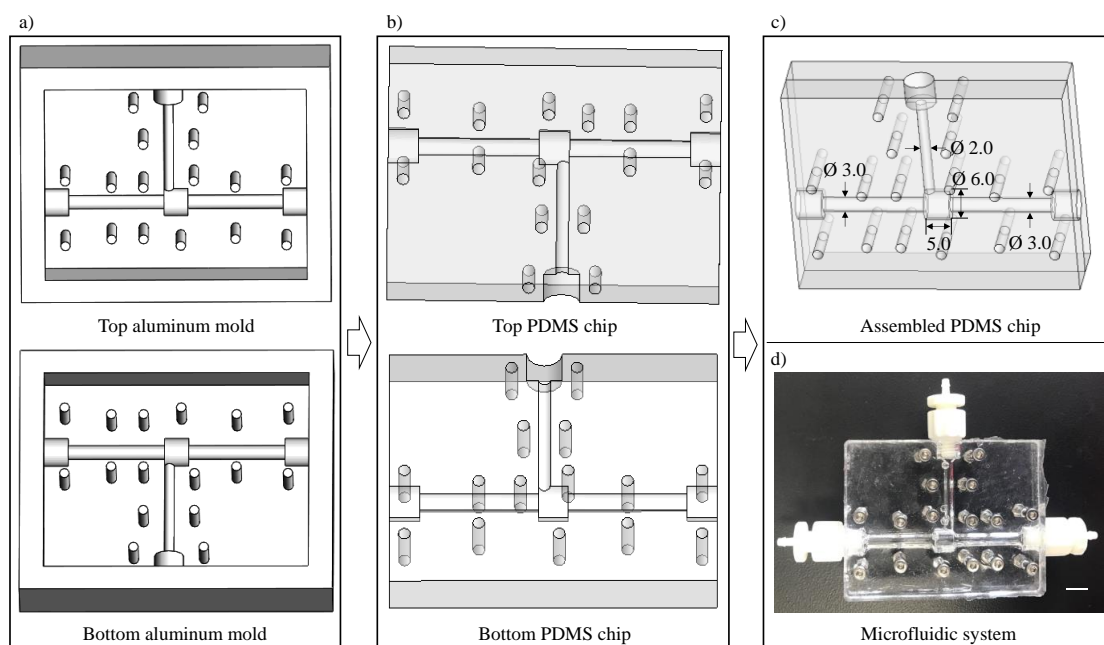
Design and fabrication of PDMS microfluidic system. a) Design and machining of the aluminum molds. b) Casting and cross-linking PDMS chips in the molds. c) Schematic of assembled PDMS microfluidic chip (unit: mm). d) The image of the assembled PDMS microfluidic system. (Scale bar: 5.0 mm)
